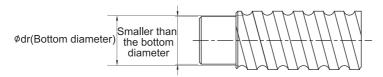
Toothed - Inner Circulation Shaft End Necessary Conditions
